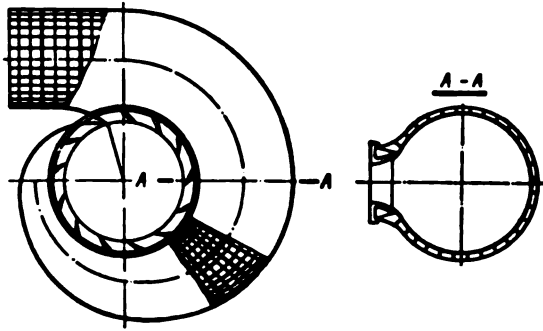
Design of a welded scroll casing with ribs
